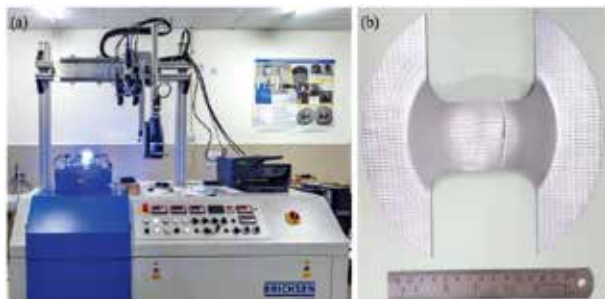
(a) Erichsen sheet metal testing machine, (b) grids generated on aluminium sheet.
